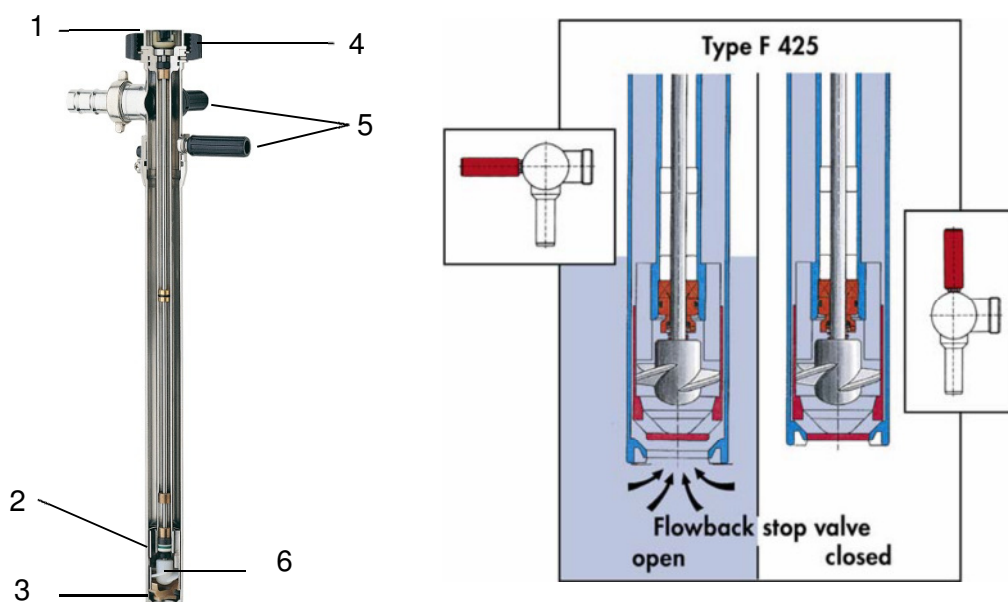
Cross-section of F 425 S and operating principle (sample view)
